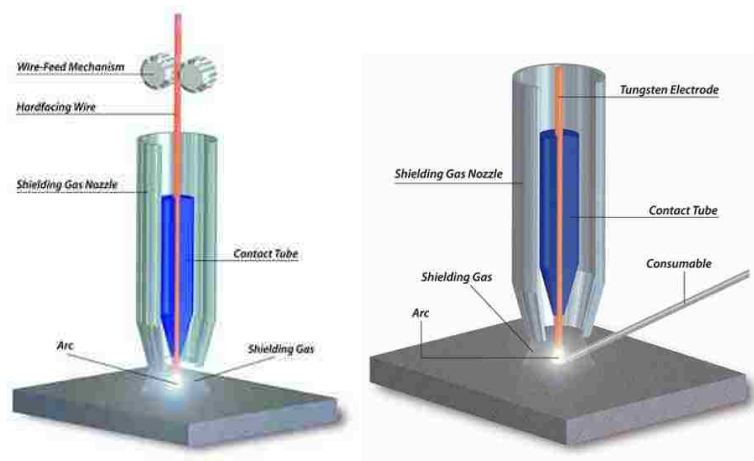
diagrams describe GMAW (left) and GTAW(right) welding processes[41]
